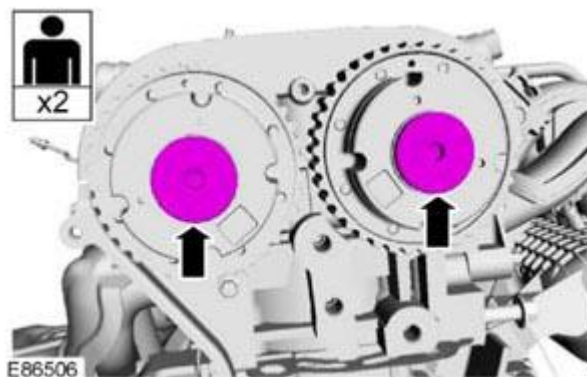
Locating Camshaft Phaser And Sprocket Plugs
